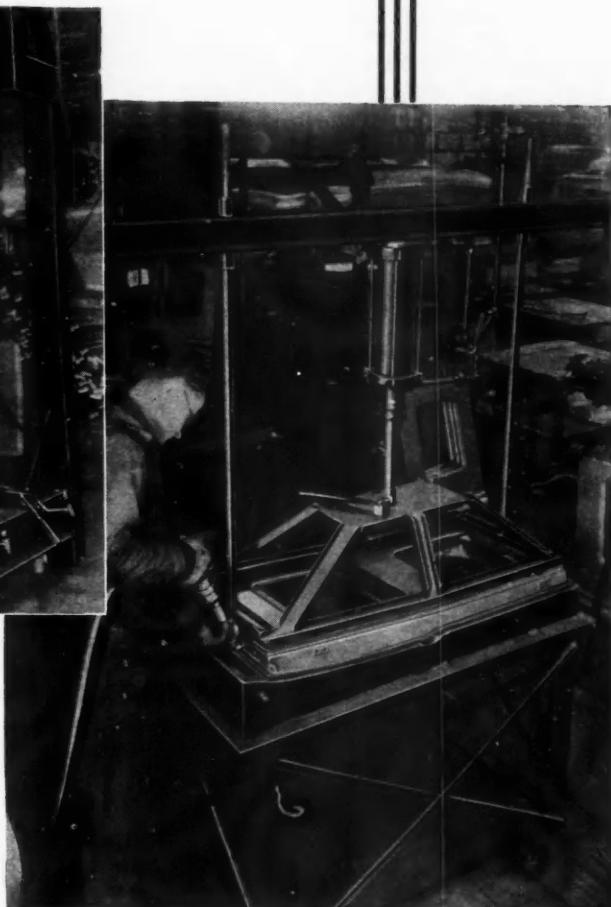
Doors are assembled on air-clamp jigs out of two stampings by rolling over edges with air hammers as shown here
